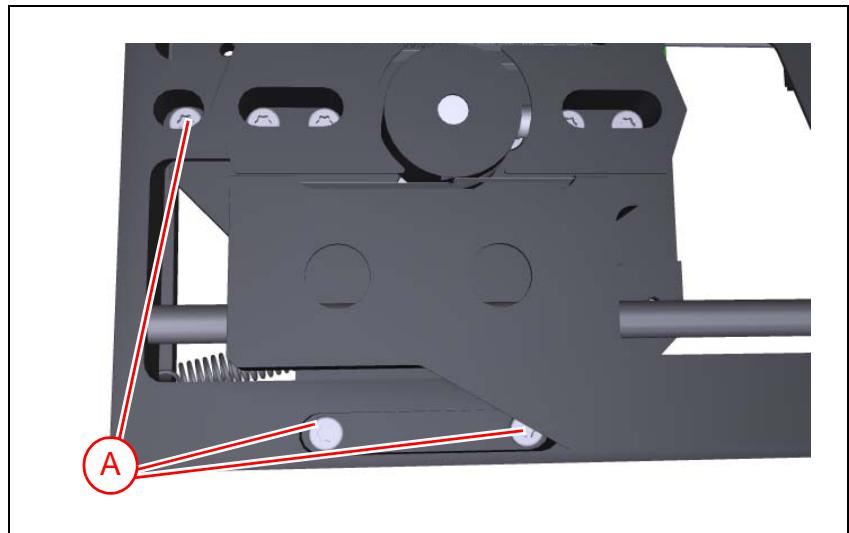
Loosen locking screws, left centering unit (Bottom view).
